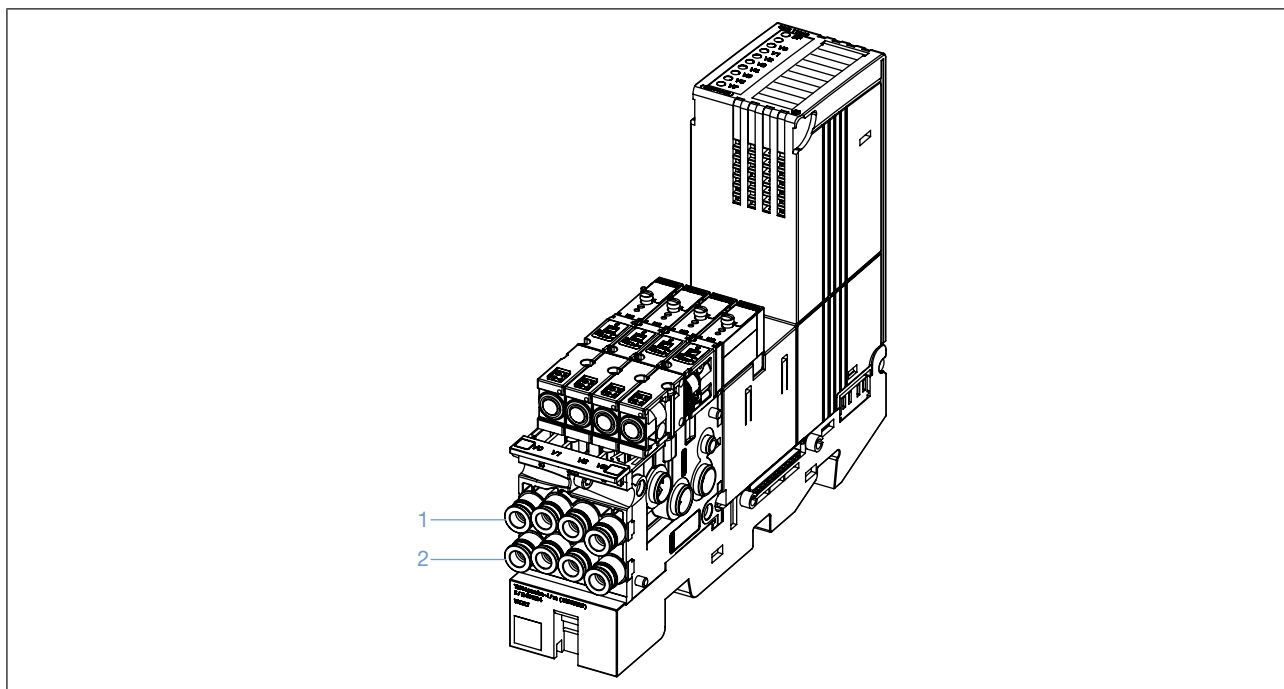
Possible variants of the work ports (example: width per valve 44 mm)
